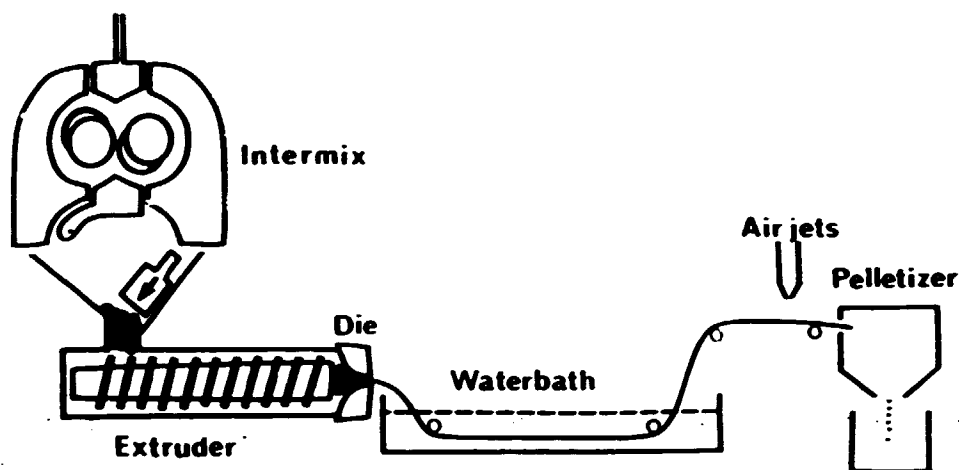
Layout of the Francis-Shaw mixer/extruder.
